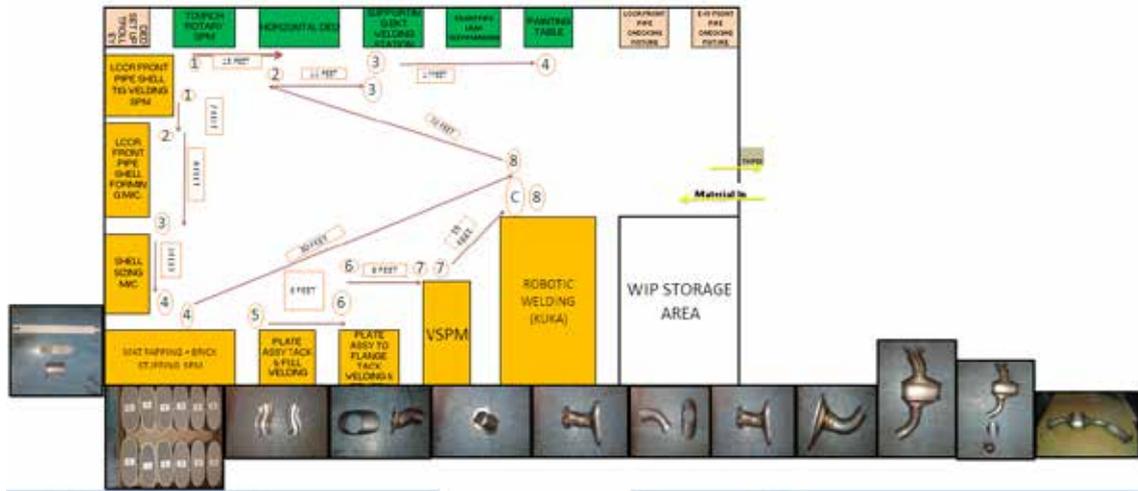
Scorpio W105 LCCR Front Pipe Assembly Layout
